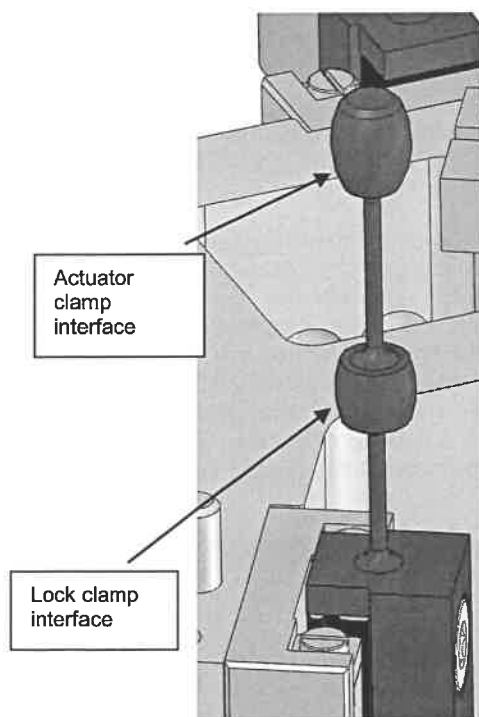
A wire-type flexural rod that couples each actuator to its hexapod leg. The upper barrel-shaped clamping interface is for actuator coupling while the lower interface is for the locking mechanism.
